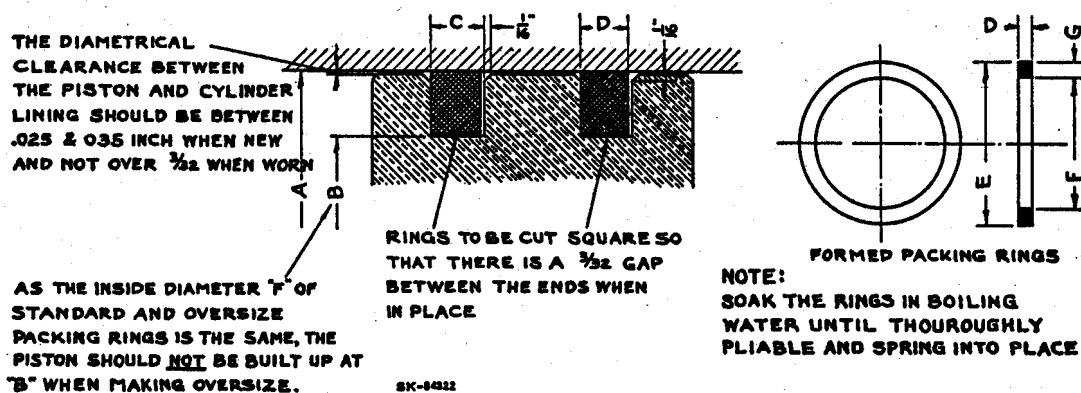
Dimensions of Piston Groove and Packings, Solid Type Hot Water Pump Pistons.
